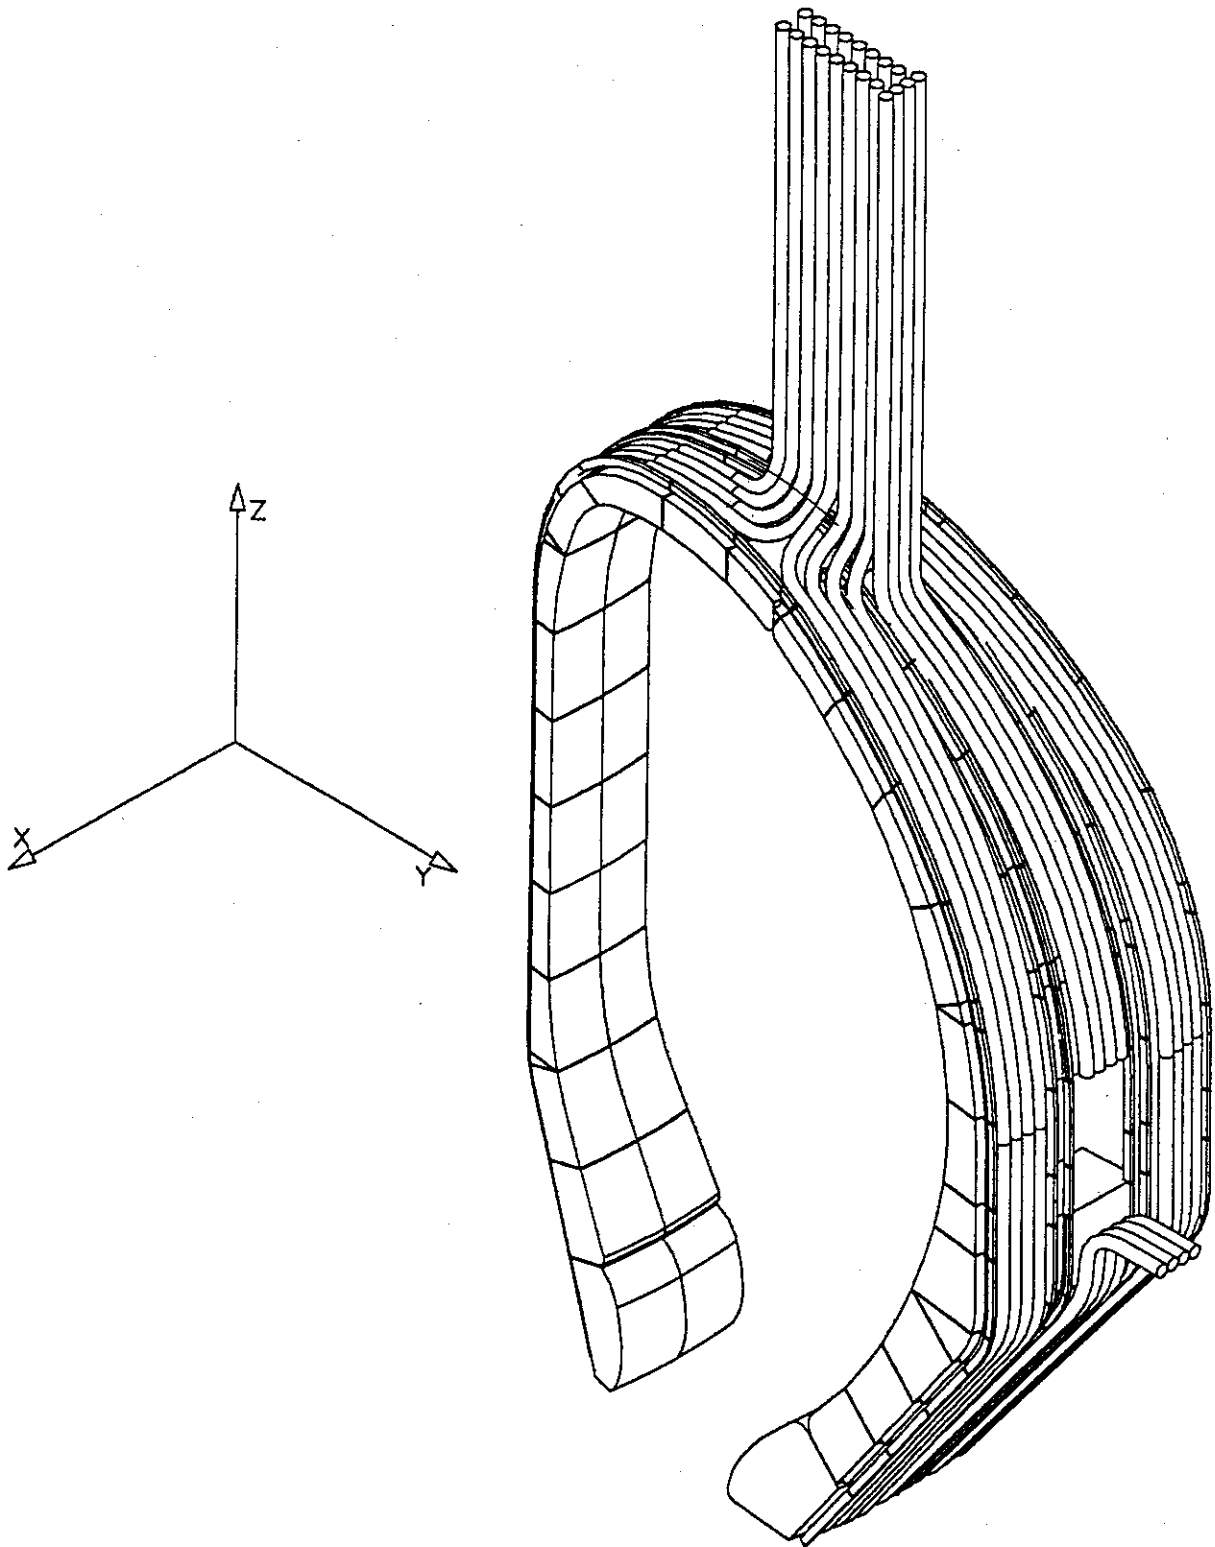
3 Three dimensional piping layout for the blanket module.
